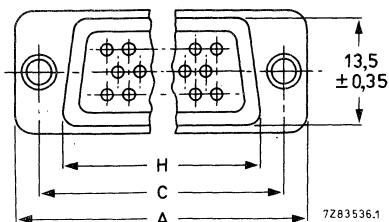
Terminal side of pin (or socket) connector; see also Table 2.
